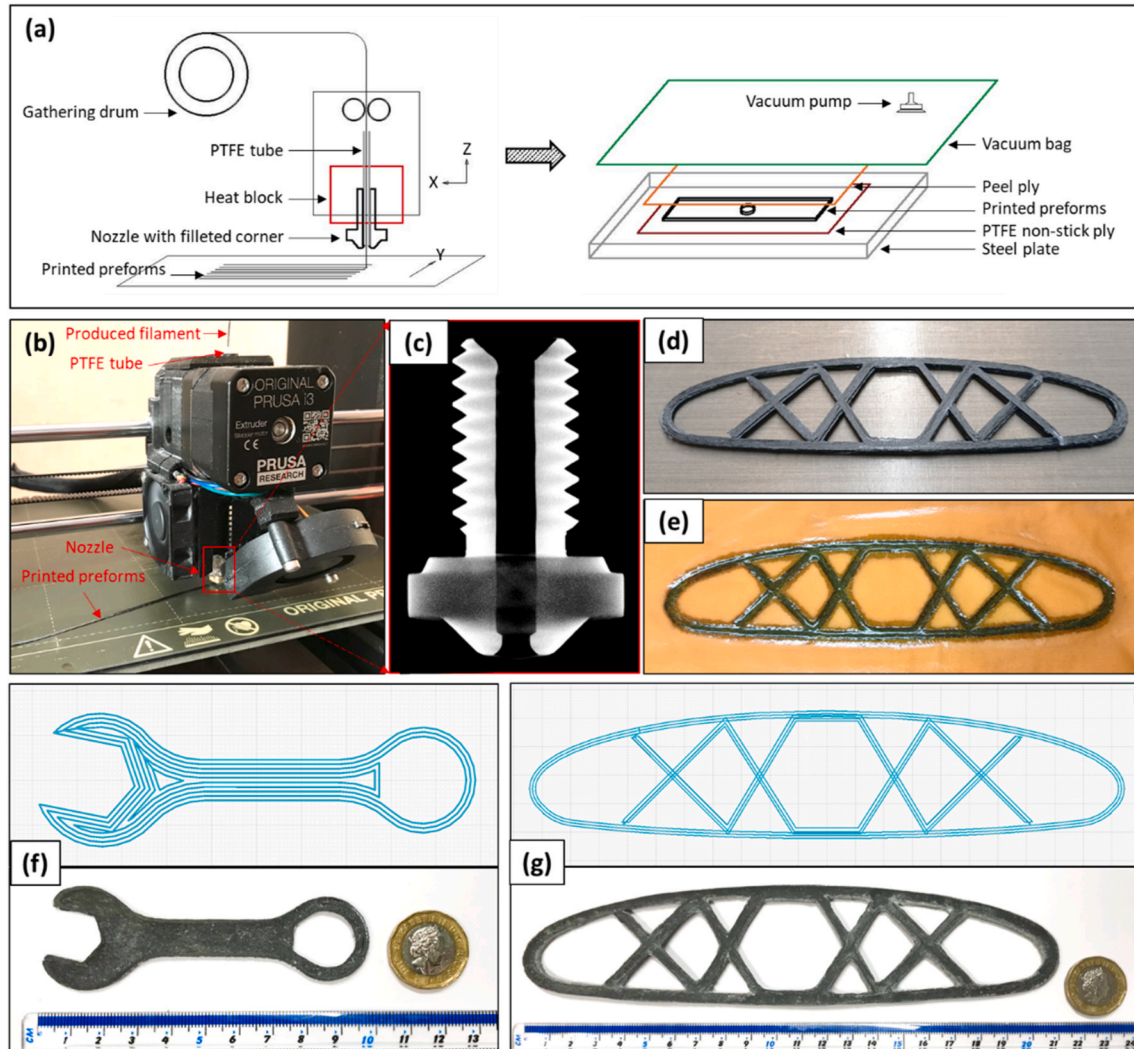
(a) Schematic of the printing and curing processes (b) modified Prusa i3 print-head for CCF/epoxy filament printing (c) brass nozzle for continuous filament printing (d) printed multilayer preforms before curing and (e) the setup of oven curing and vacuum bagging (f) & (g) demonstration with complex geometries.
